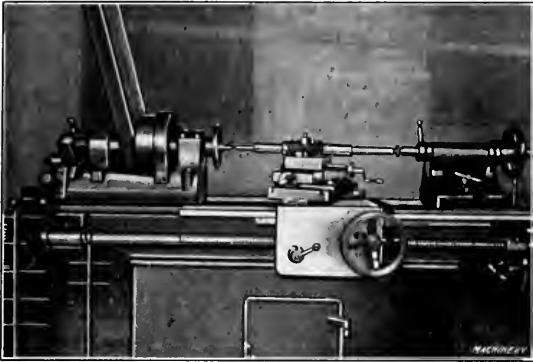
A Special Type of Lathe used for backing-off or relieving Tapered Hobs
